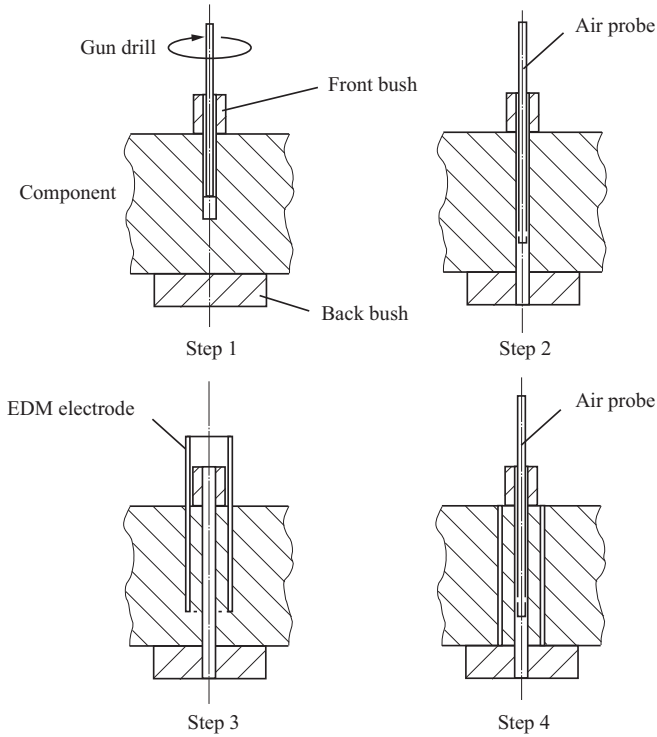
Steps in the deep hole drilling technique: step 1—drilling of reference hole, step 2—measurement of reference hole diameter, step 3—trepanning of core and step 4—re-measurement of reference hole.
